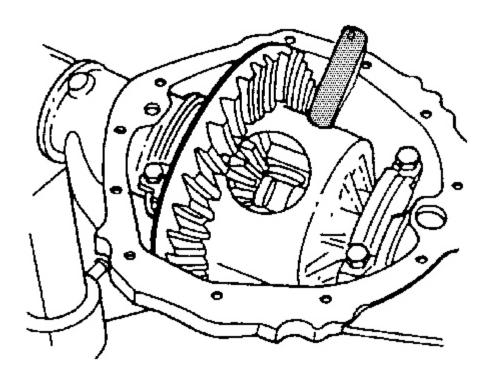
Pinion Shaft Touching Housing Courtesy of GENERAL MOTORS CORP.
